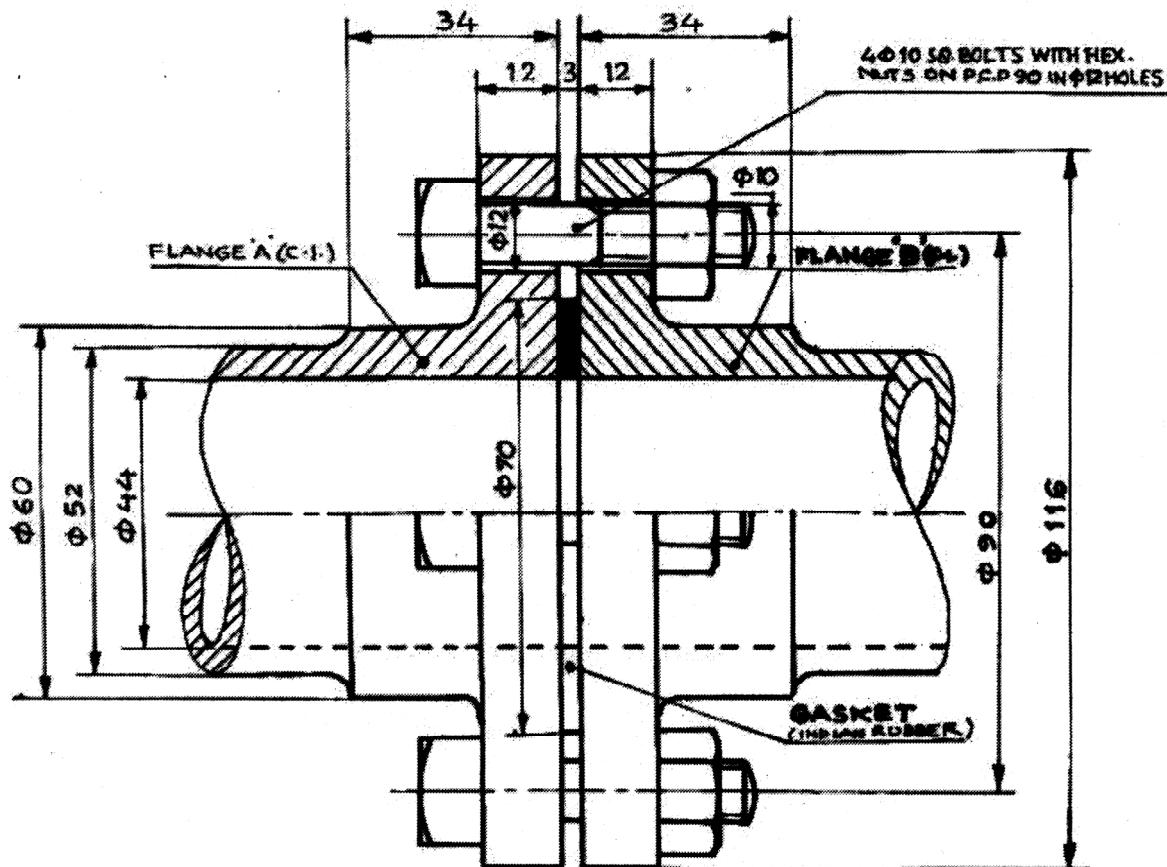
shows the assembly of the parts of a FLANGE PIPE JOINT. Disassemble
